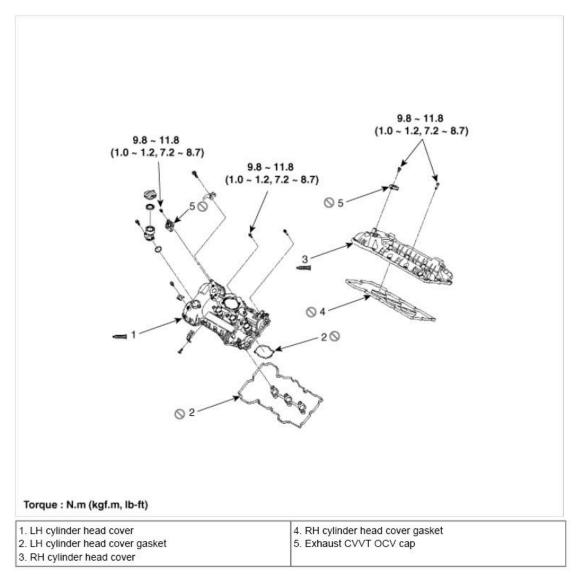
Identifying Cylinder Head Cover And Related Components With Torque Specifications Courtesy of HYUNDAI MOTOR AMERICA
